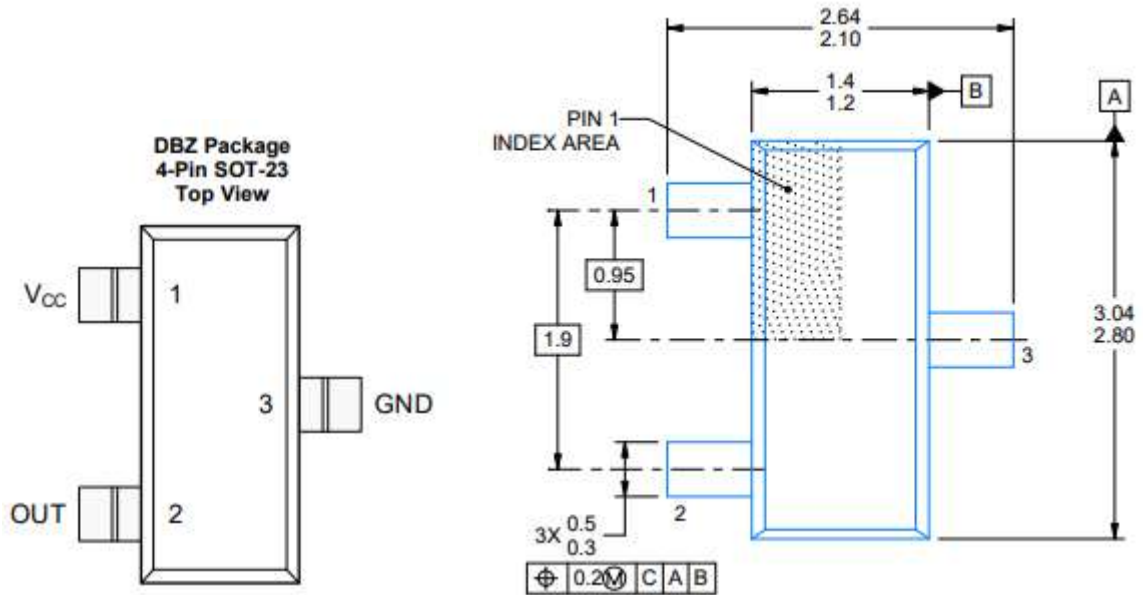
package of the DRV5056-Q1 with dimensions given in mm
